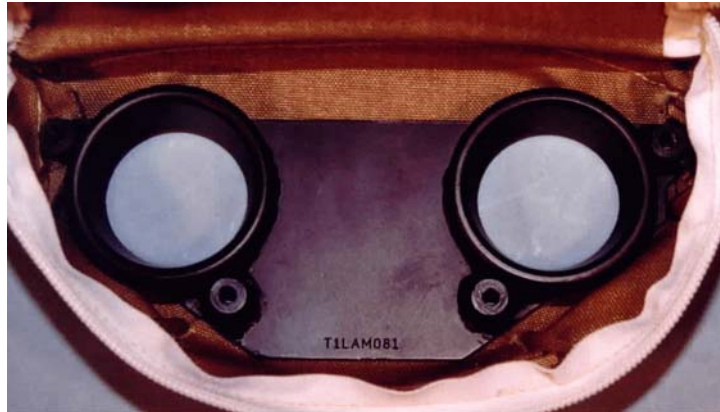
Internal Mounting Weld assembly positioned properly inside of bag
